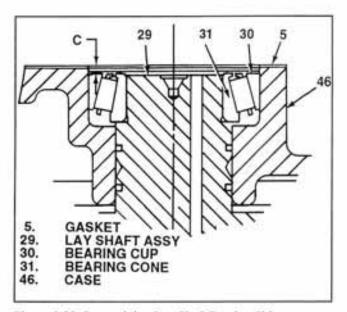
Determining Lay Shaft Bearing Shim Thickness
